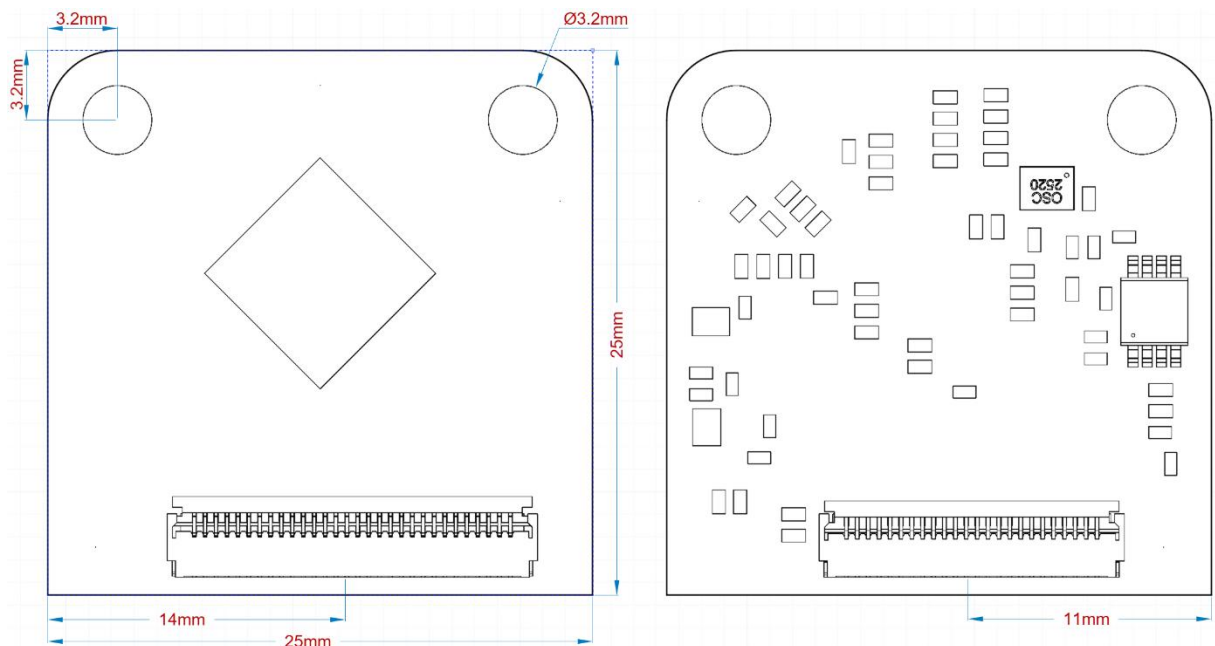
DSI to HDMI Adapter Dimensions – Top and Bottom Sides
